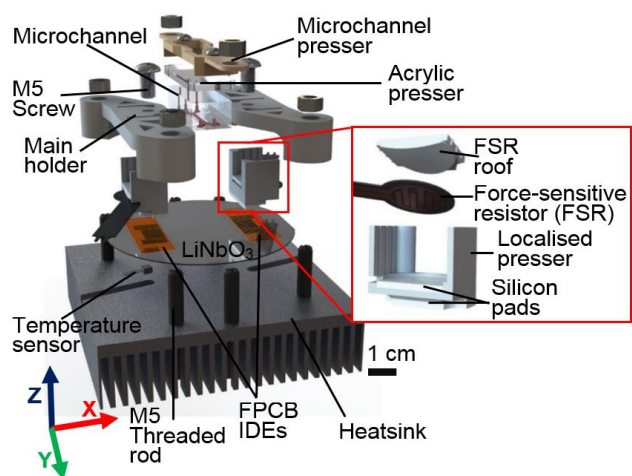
3D exploded view of the VAD with an inset presenting the assembly and components at the localised pressers.
